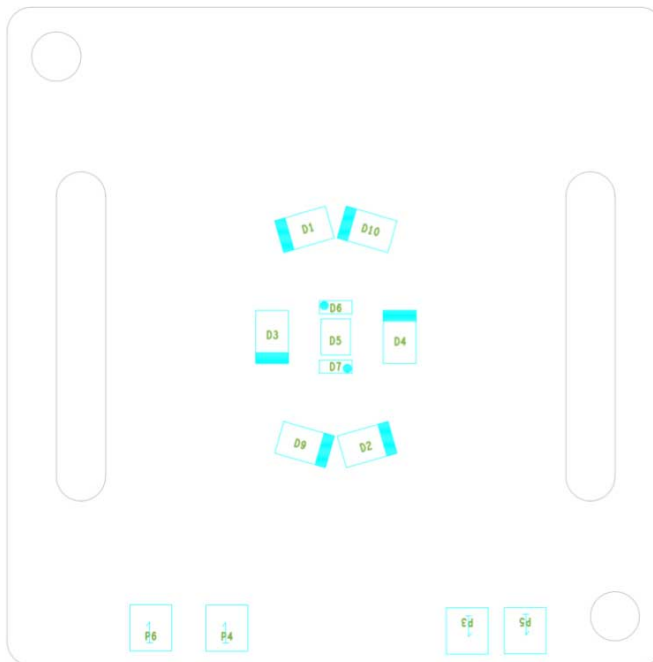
EVAL-ADPD6000Z PCB Layout: Bottom
